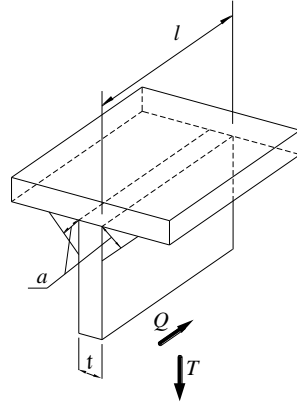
Forces Acting on Fillet Welded Joint
